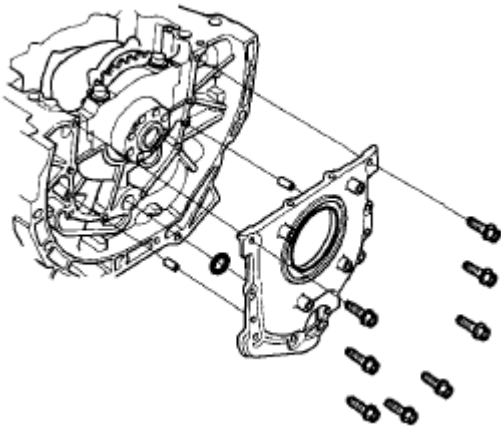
Identifying Engine Block End Cover With Mounting Bolts
